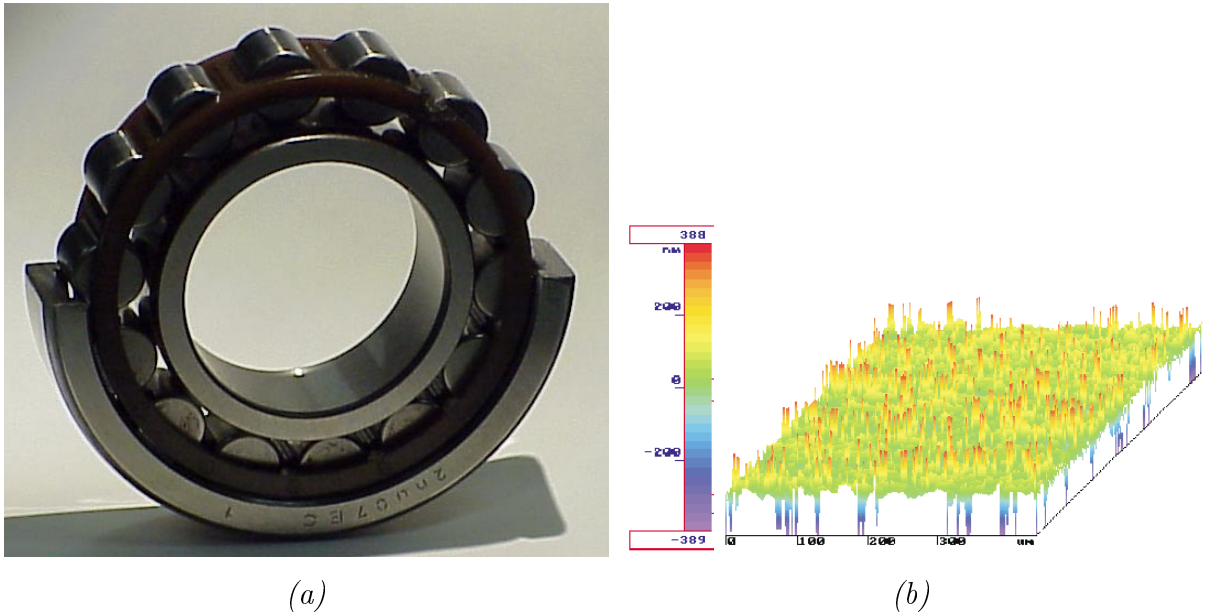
(a): Photo of cylindrical roller bearing B. (b): Surface heights of inner raceway of bearing B.
